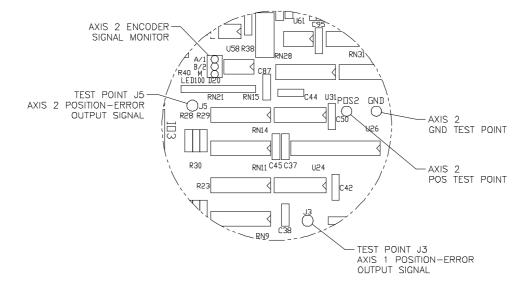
Axis 1 and Axis 2 Test Points and Indicators
